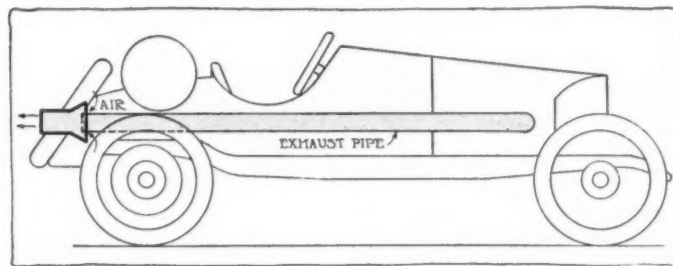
Chevrolet racer, showing method of reducing back pressure
